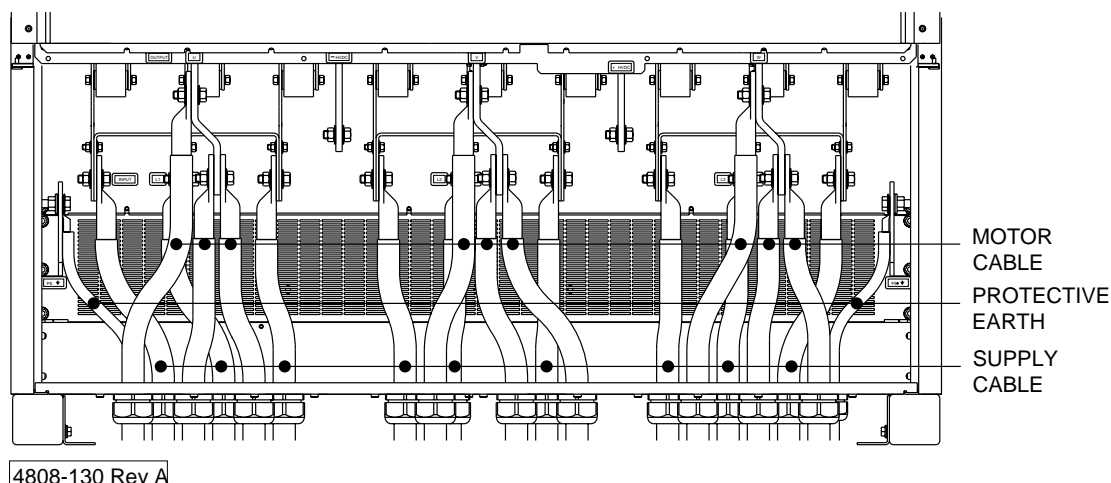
Ultradrive E-Series Frame 7 Screened Motor Cable Configuration
